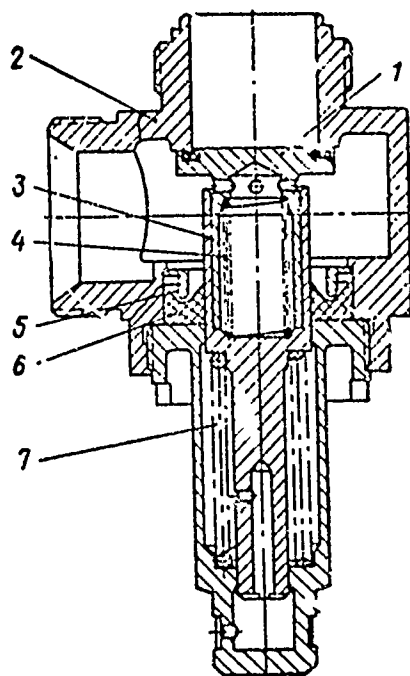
Special relief valve: 1 - valve; 2 - body; 3 - bushing; 4 - auxiliary spring; 5 - collar; 6 - seal ring; 7 - main spring.
